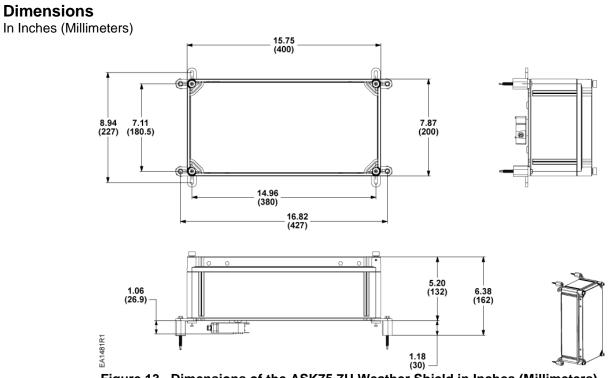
Dimensions of the ASK75.7U Weather Shield in Inches (Millimeters).
